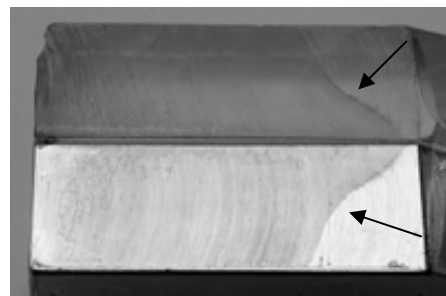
GB 350, specimen 4 topview of bonding surface after failure
